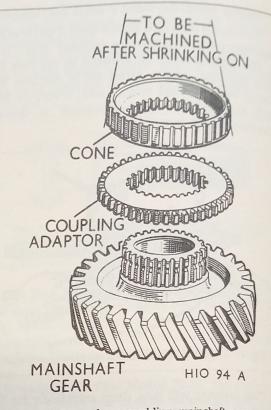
Order for assembling mainshaft gear and synchroniser.
